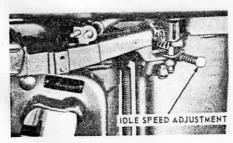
Some models have an idle speed adjusting screw shown. Speed at idle in forward gear should be approximately 550 RPM.
